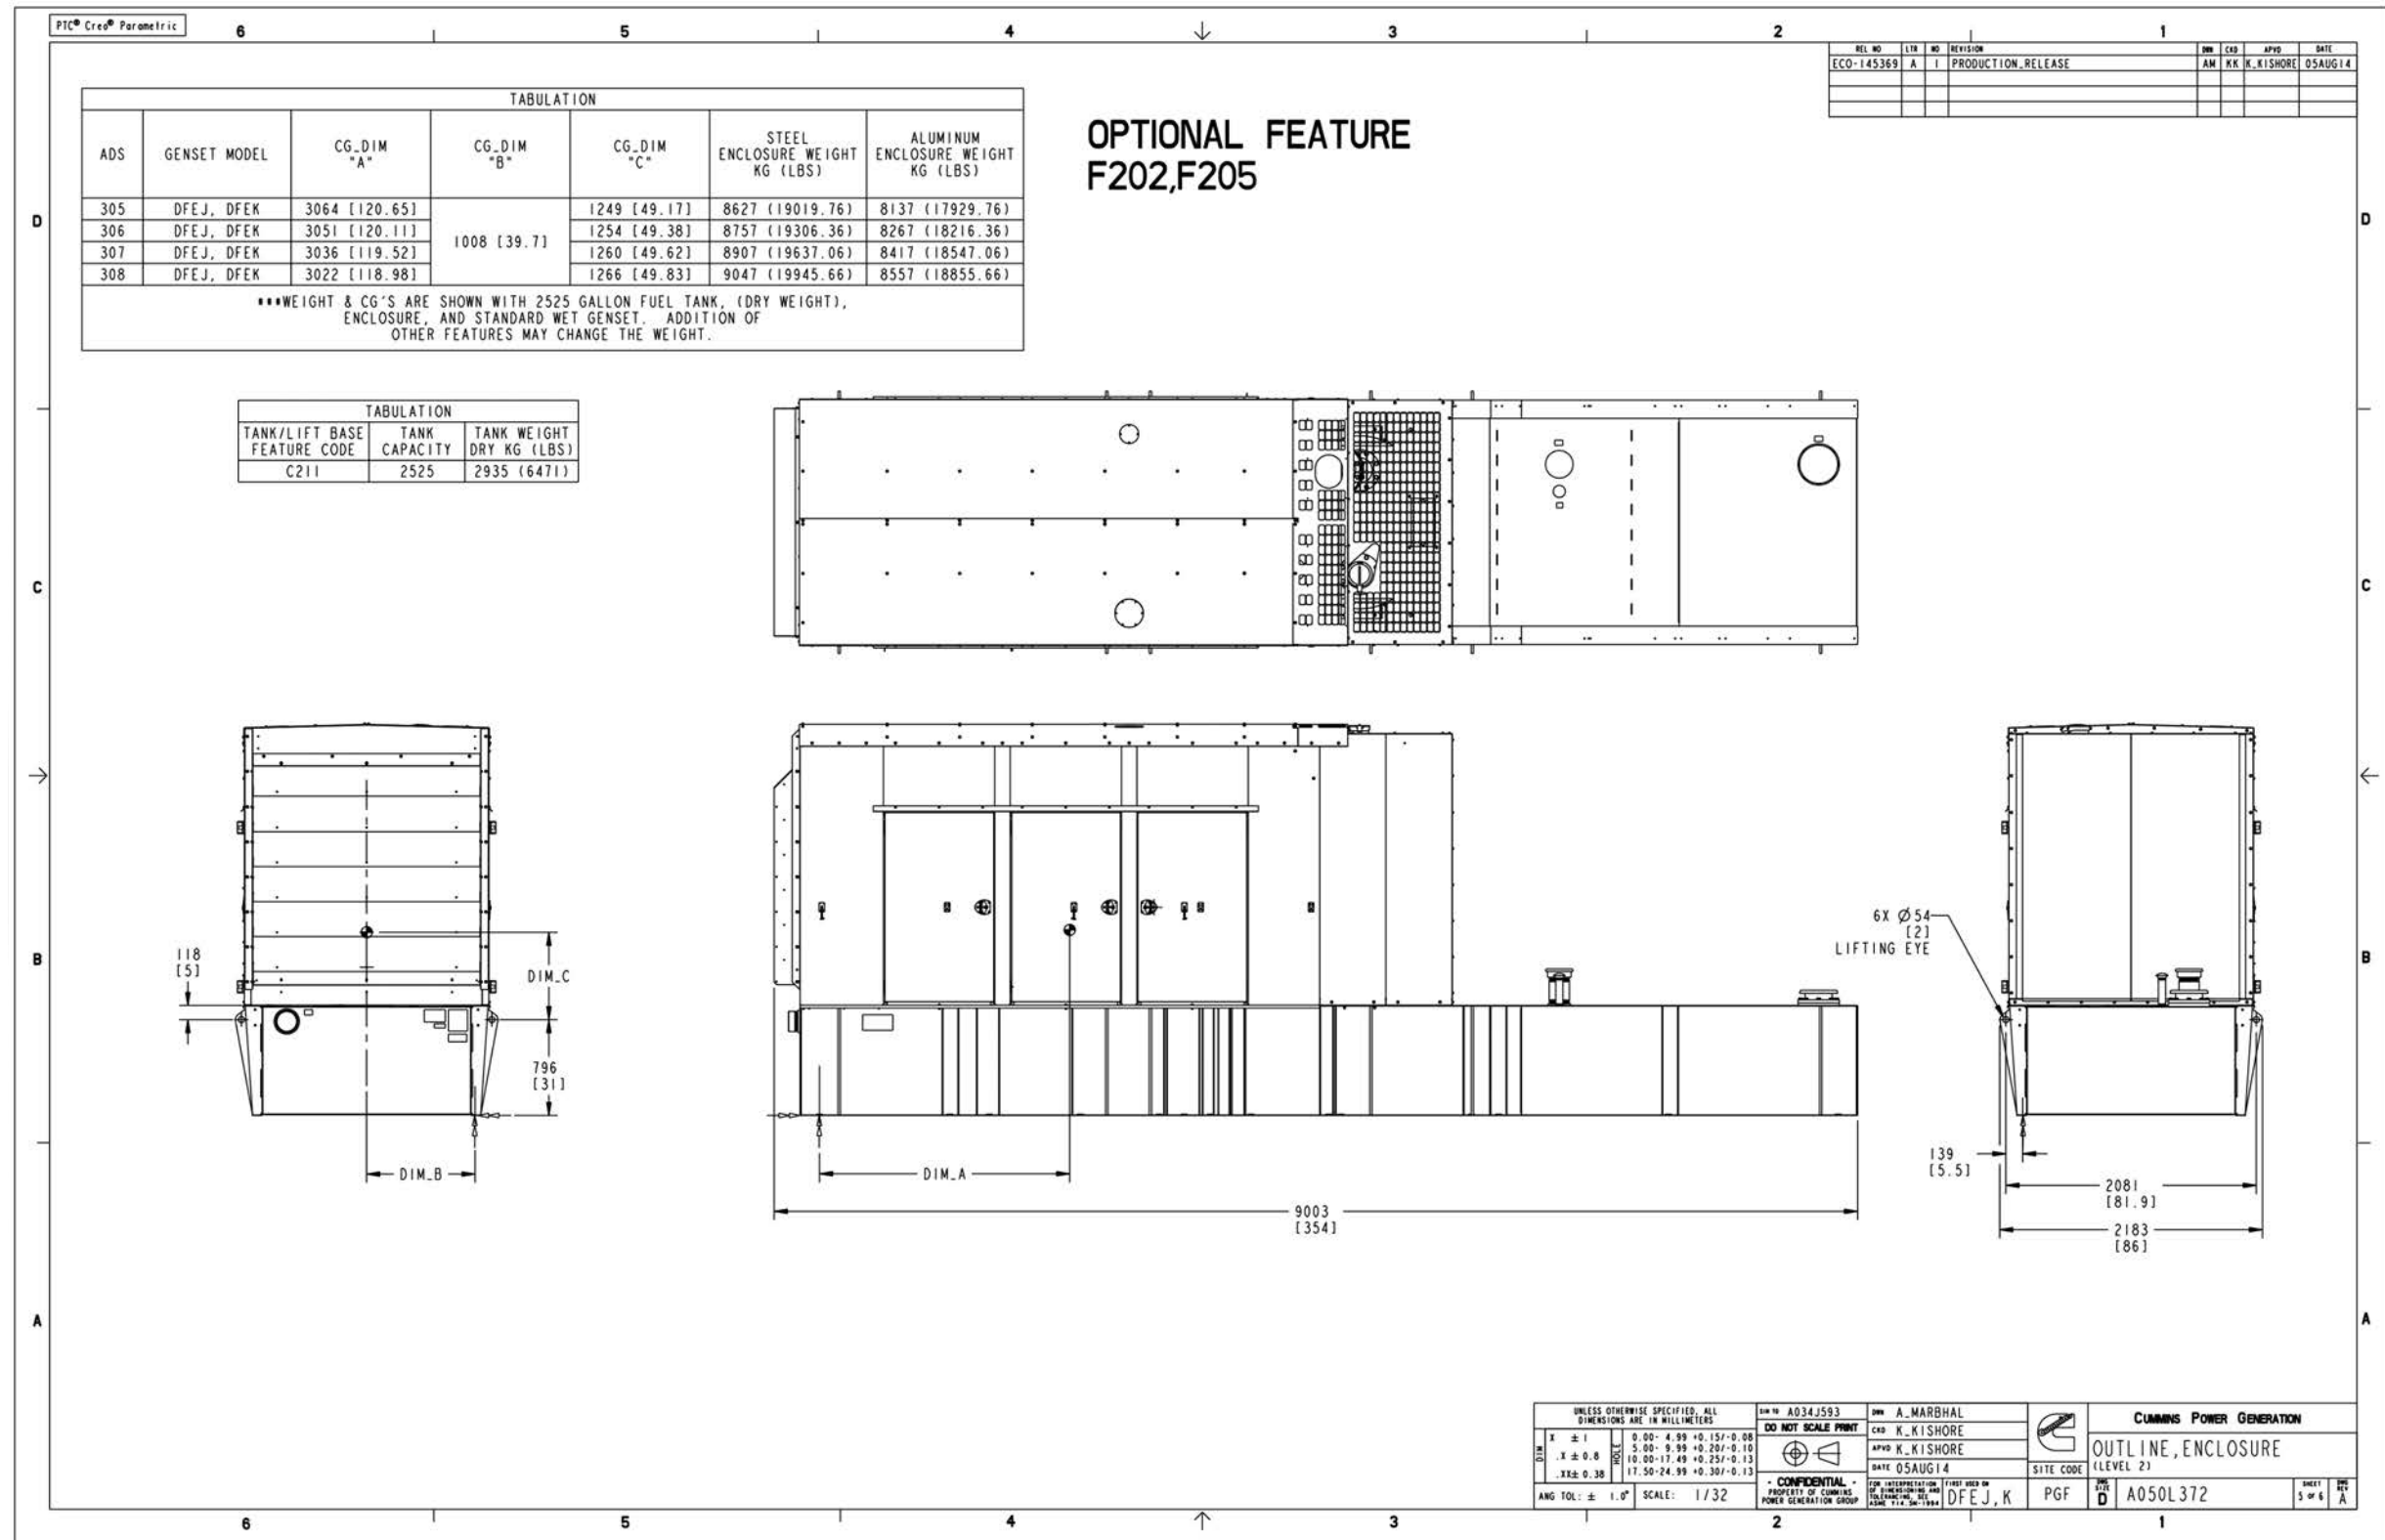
ENCLOSURE OUTLINE DRAWING (F202, F205, F206, F208, F209) (SHEET 5)
